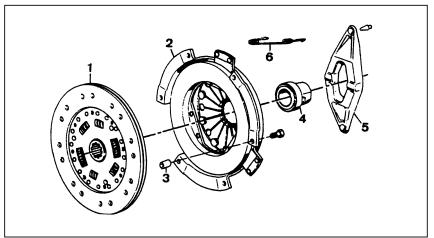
Components of the diaphragm clutch: 1 Clutch disc - 2 Clutch cover assembly - 3 Centering sleeve - 4 Release bearing - 5 Release fork - 6 Retaining spring
